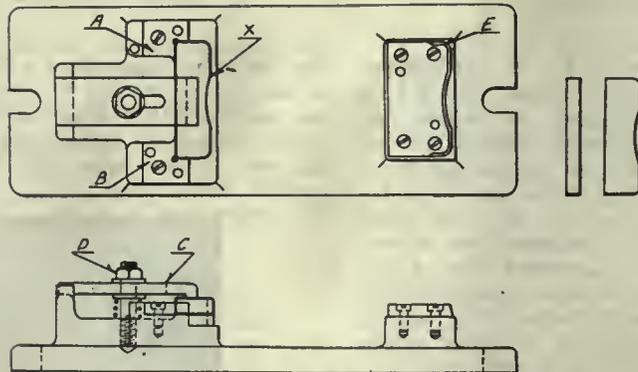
FIXTURE FOR MILLING FLAT PLATE.
